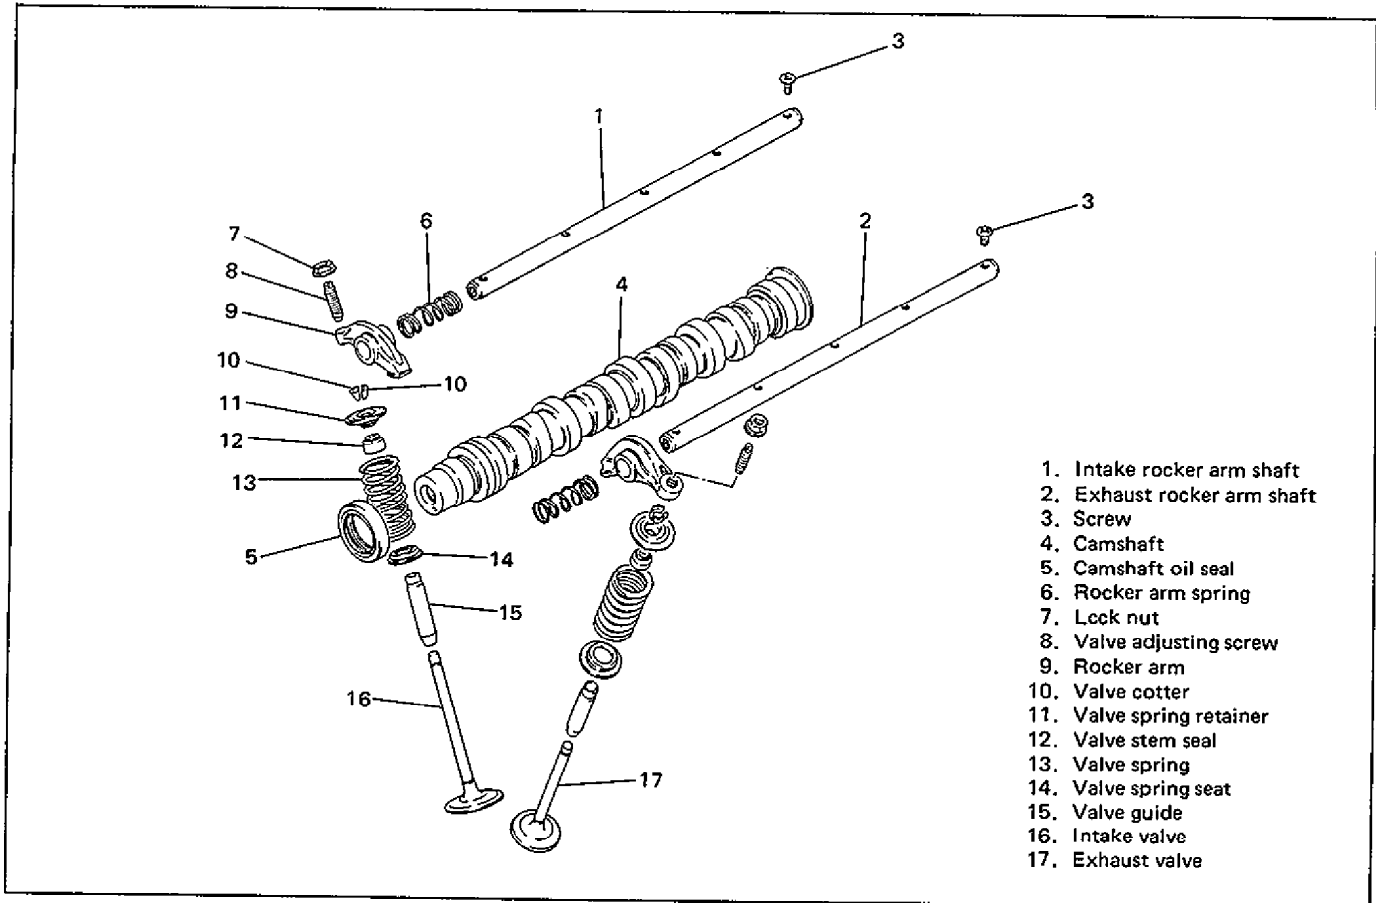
A-59 Rocker Arms, Rocker Arm Shafts, and Camshaft, etc.
